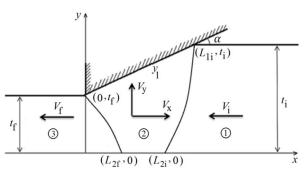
Sheet drawing process through wedge-shaped die, shear boundaries and deformation zone
